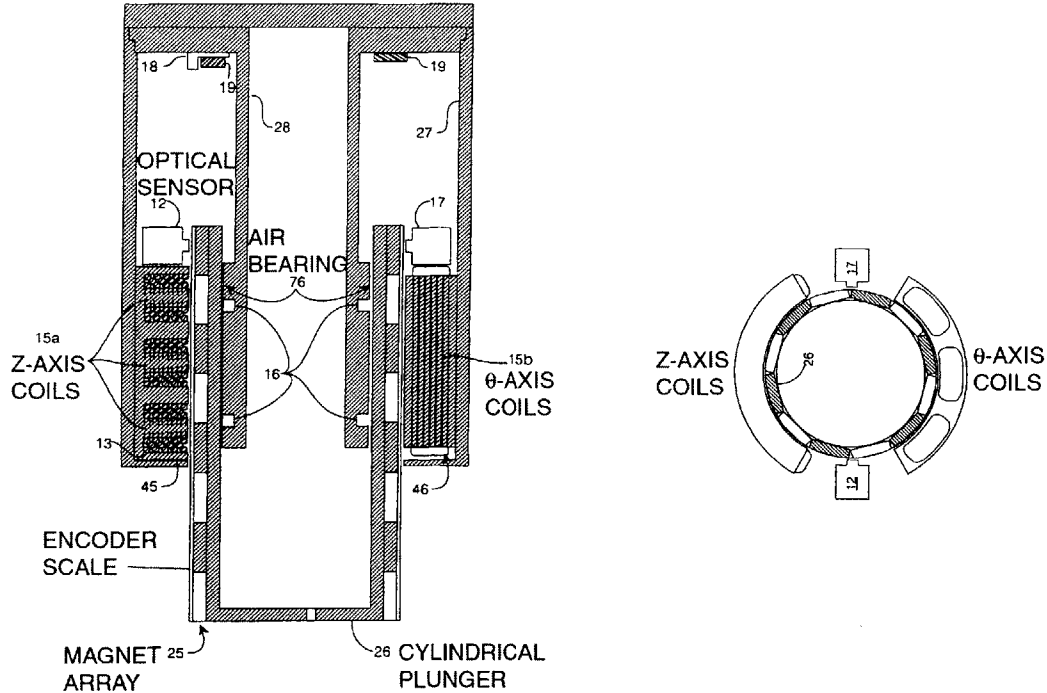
Rotary-linear actuator patented by Anorad Corporation in 1999. The view on the right is a cross-section through the motor. Figures from U. S. Patent 5,982,053 [8].
